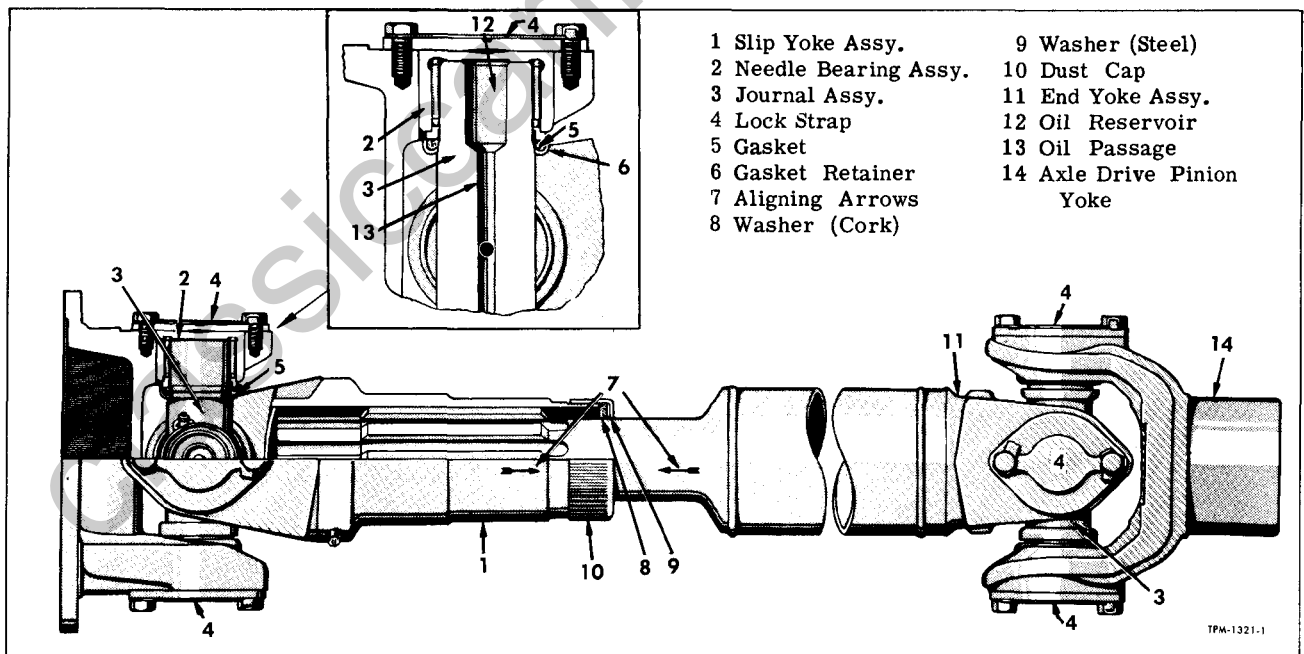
Typical Propeller Shaft with Type 1700 or 1800 Universal Joints
